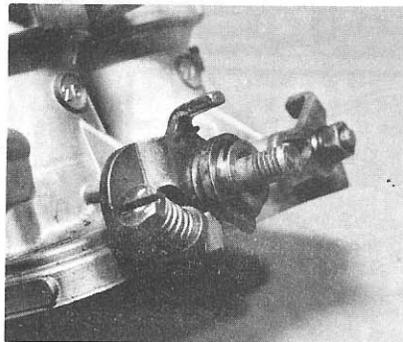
Using the special tool to hold the throttle shaft stationary (Sec 5)
